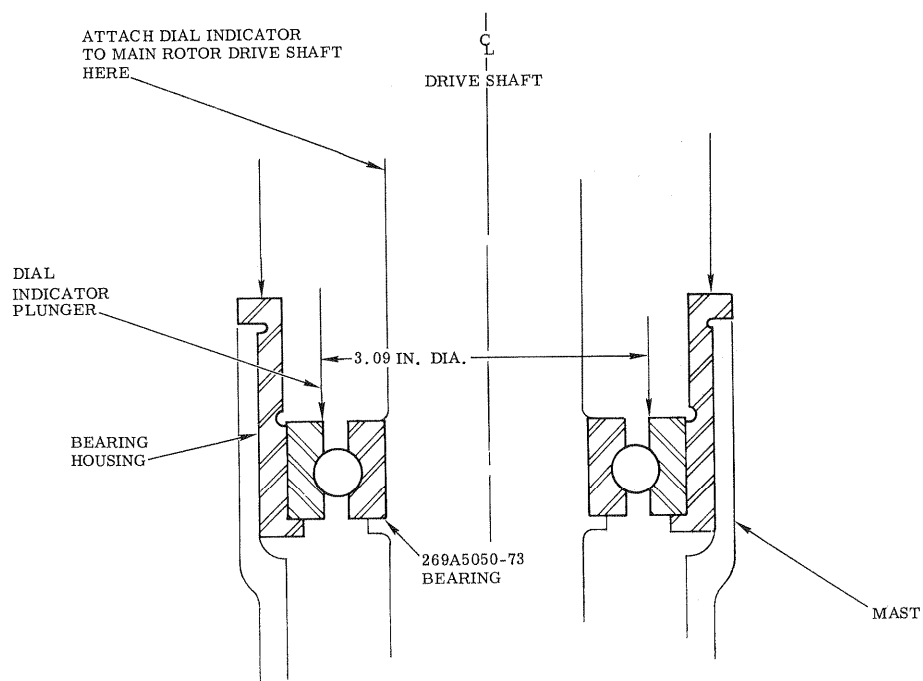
TIR CHECK - MAIN ROTOR THRUST BEARING
